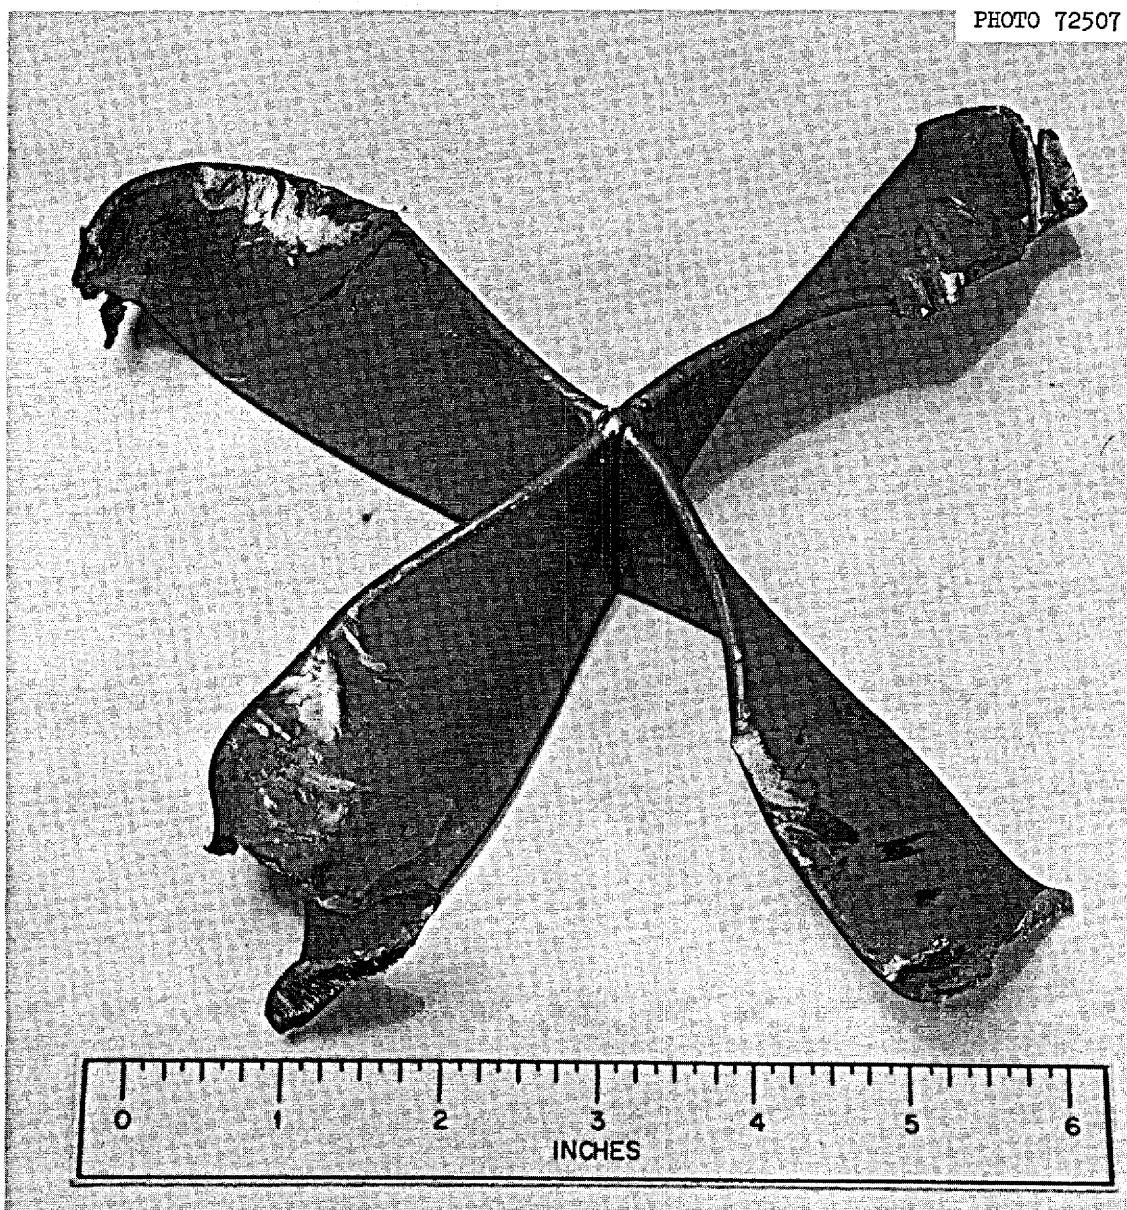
Damaged Swirl Preventer. Damage was caused by lodging of detached part of flow straightener in impeller inlet.
